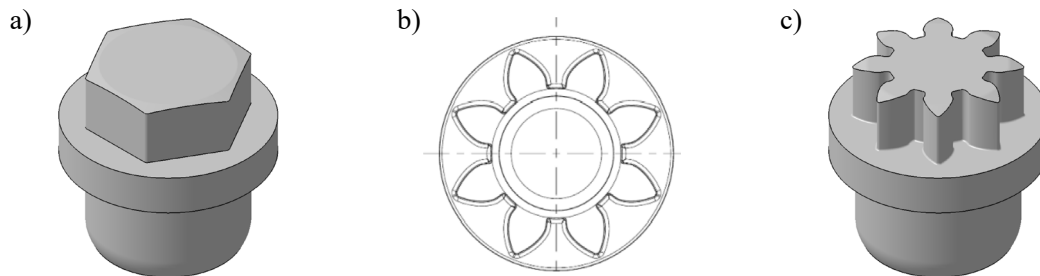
a) Standard geometry with trimmed hexagonal shape [3], b) defined splined shape for the present study and c) modified geometry with trimmed splined shape.
